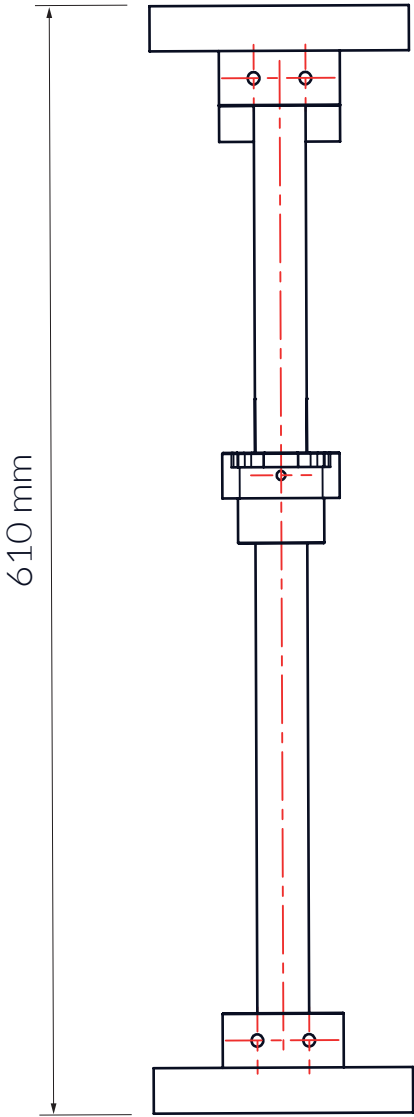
Testing machine:technical draw with the measurements of the steel parts.
